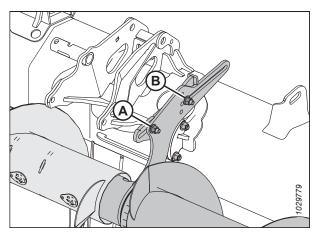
Initial Position of Adjustable Mounts – Three-Piece Auger
